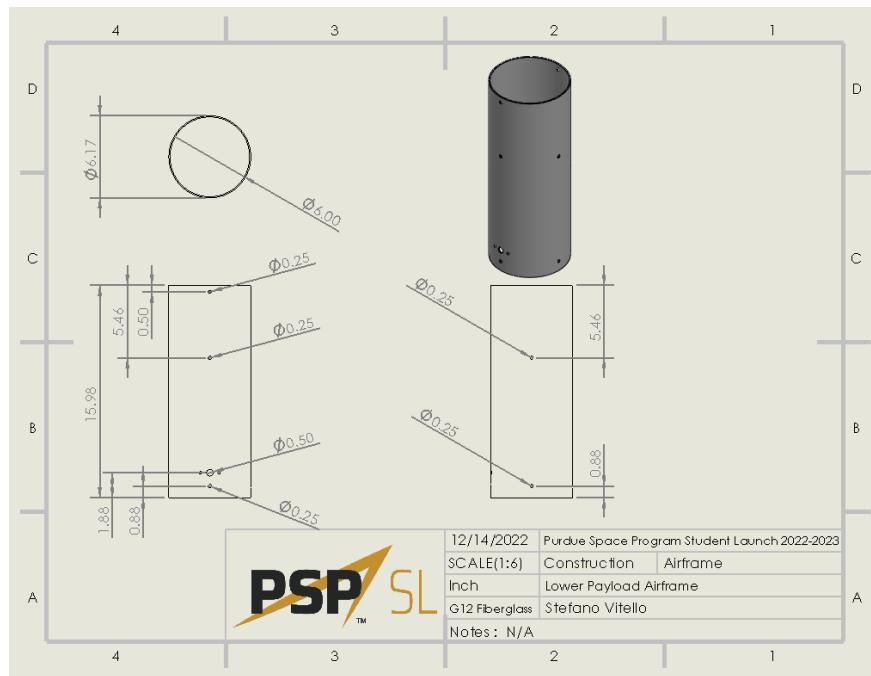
Technical Drawing for Lower Payload Airframe
